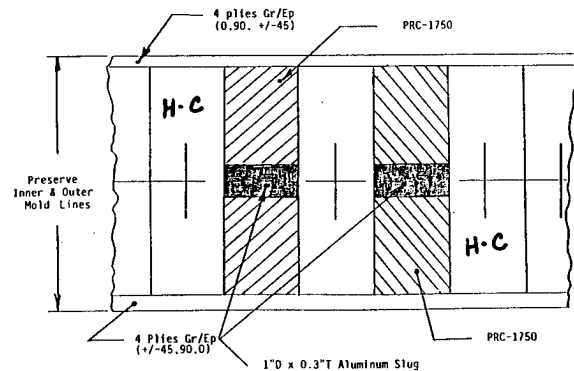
Cross Section of Composite Panel Using Tuned Dampers.
